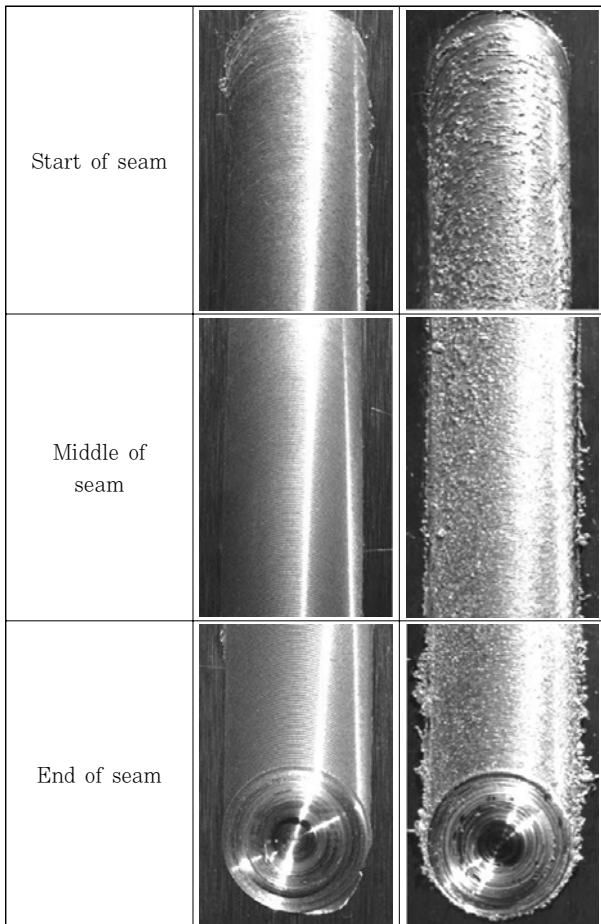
Welds with VDI 24 (Left) and VDI 39 (Right)
